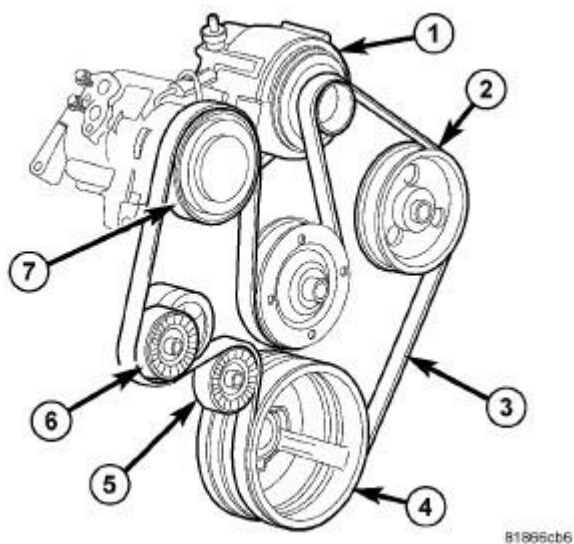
ACCESSORY DRIVE BELT ROUTING 3.7L/4.7L
